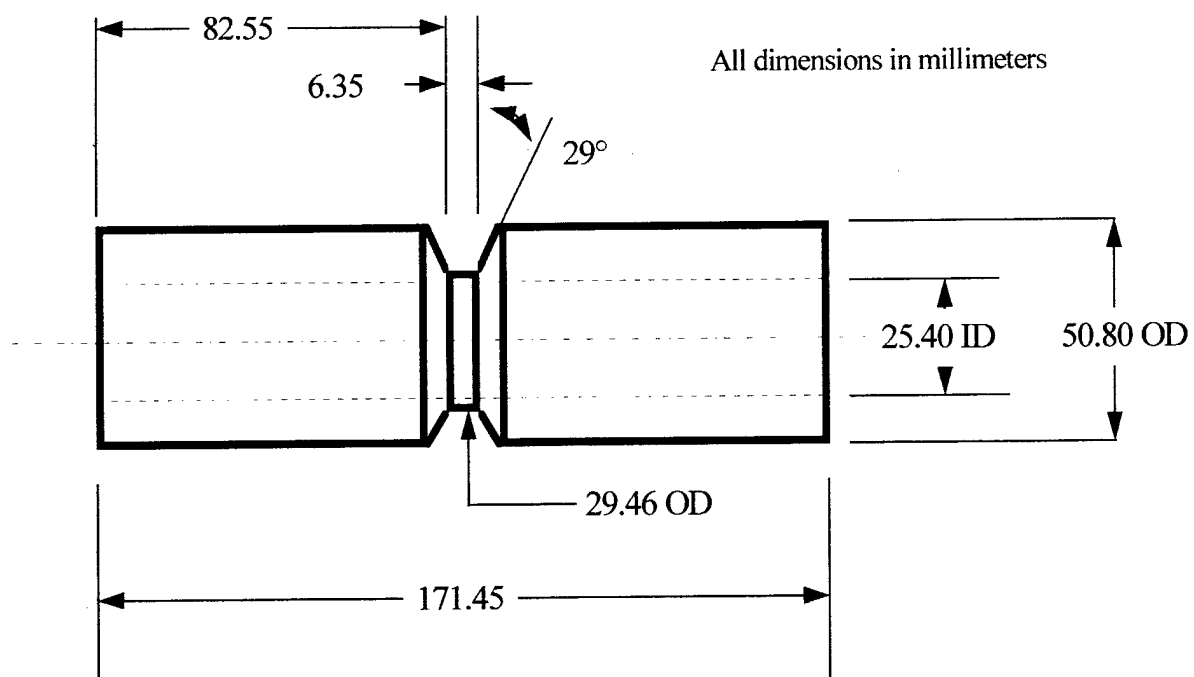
Drawing of a 50.8 mm diameter Lindholm specimen. All dimensions are in mm.
